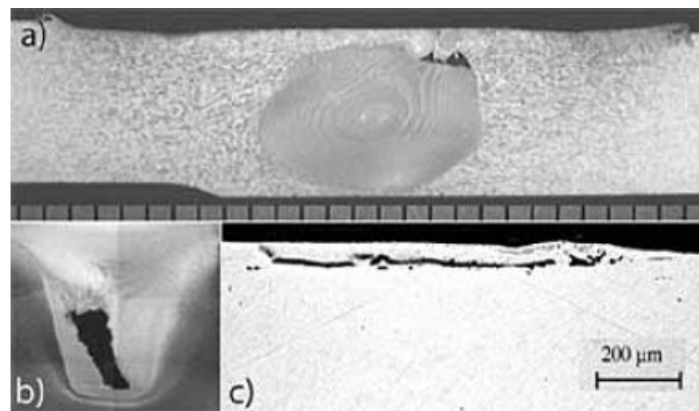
Typical flaws in friction stir welds: a) volumetric flaw in Al2014; b) tunnel (wormhole) in Al7449; c) surface defect located under shoulder in 2014 aluminium alloy [7]
